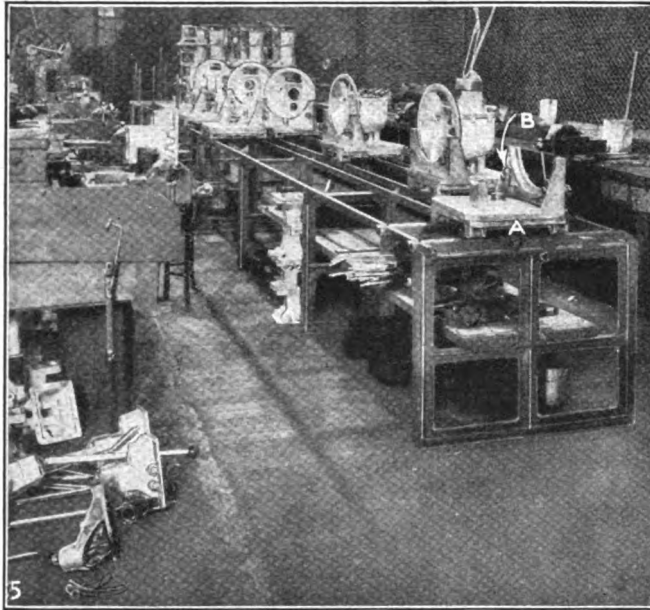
THE TRANSMISSION ASSEMBLY. FIG. 6—BRINGING THE TRANSMISSION TO THE MOTORS
